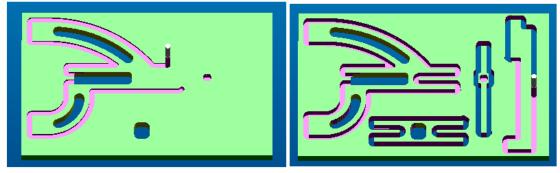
Showing the EdgeCAM simulation environment providing visual feedback of milling tool path prior to CNC machining of the parts.
